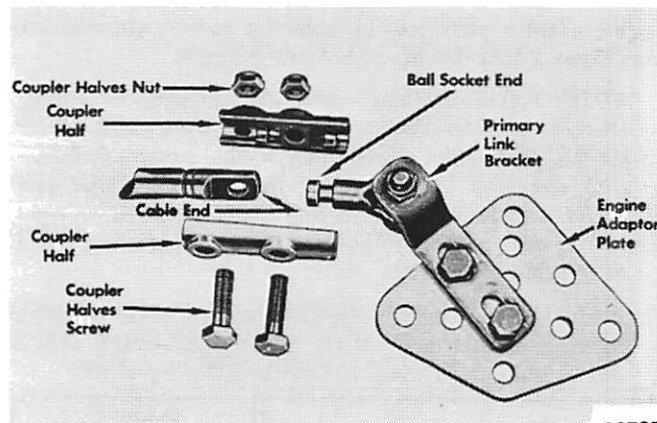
Pivot Pin and Ball Socket Assembly, Dual Engine
